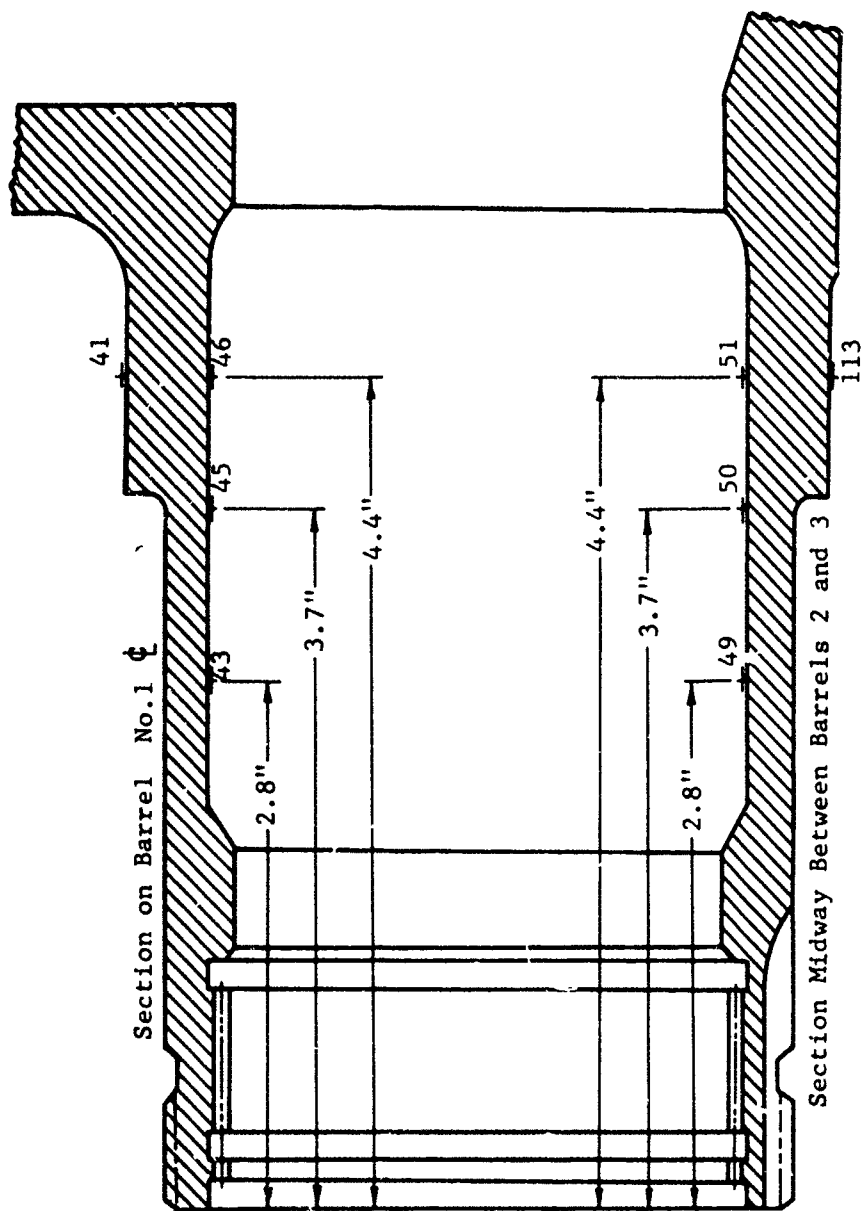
Location of wire strain gages on inner and outer surfaces of rear extension of X-19 propeller hub 162595 during static testing in hub tension machine.
